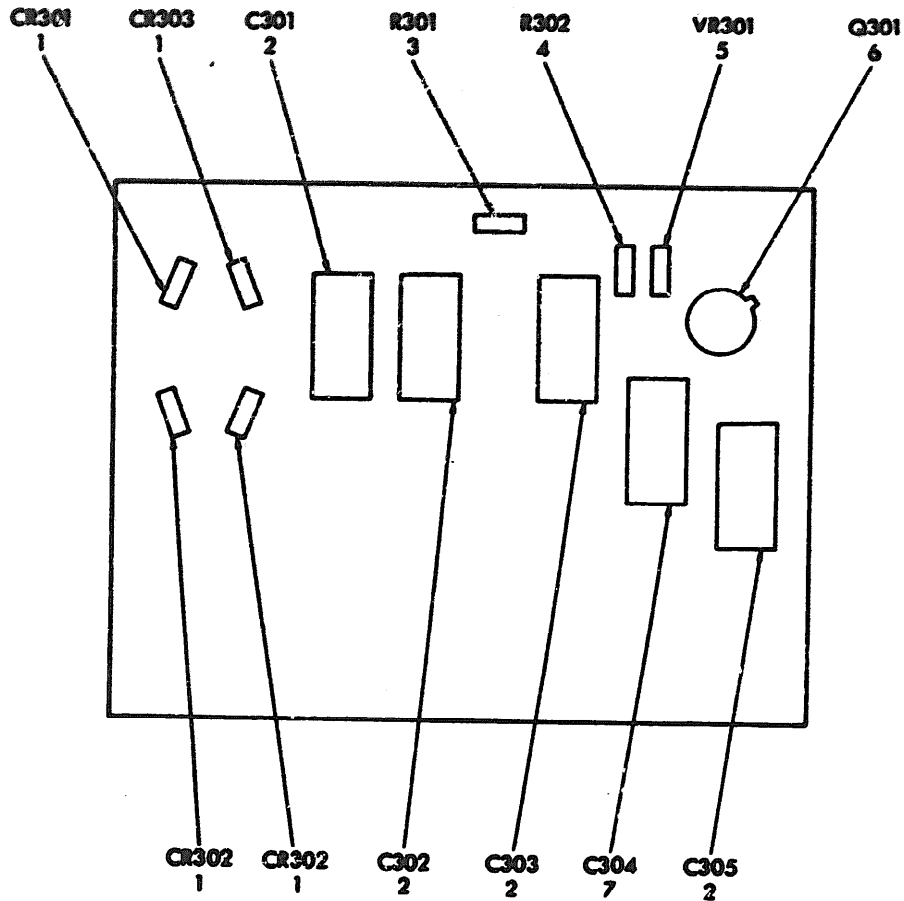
4. ELECTRONIC COMPONENTS ASSEMBLY /SHEET 3 OF 5/
